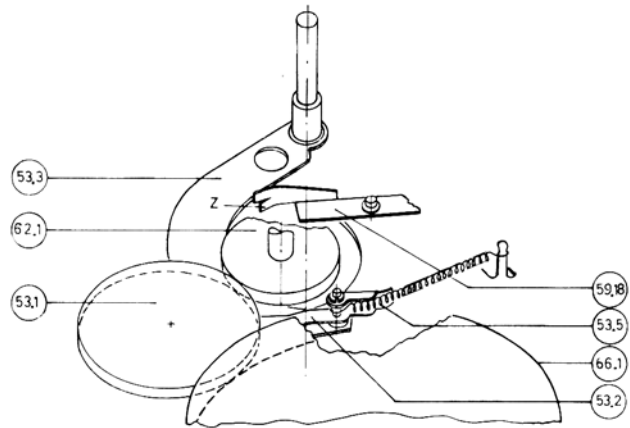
The speed transfer wheel engaged with the motor pulley and the flywheel.
